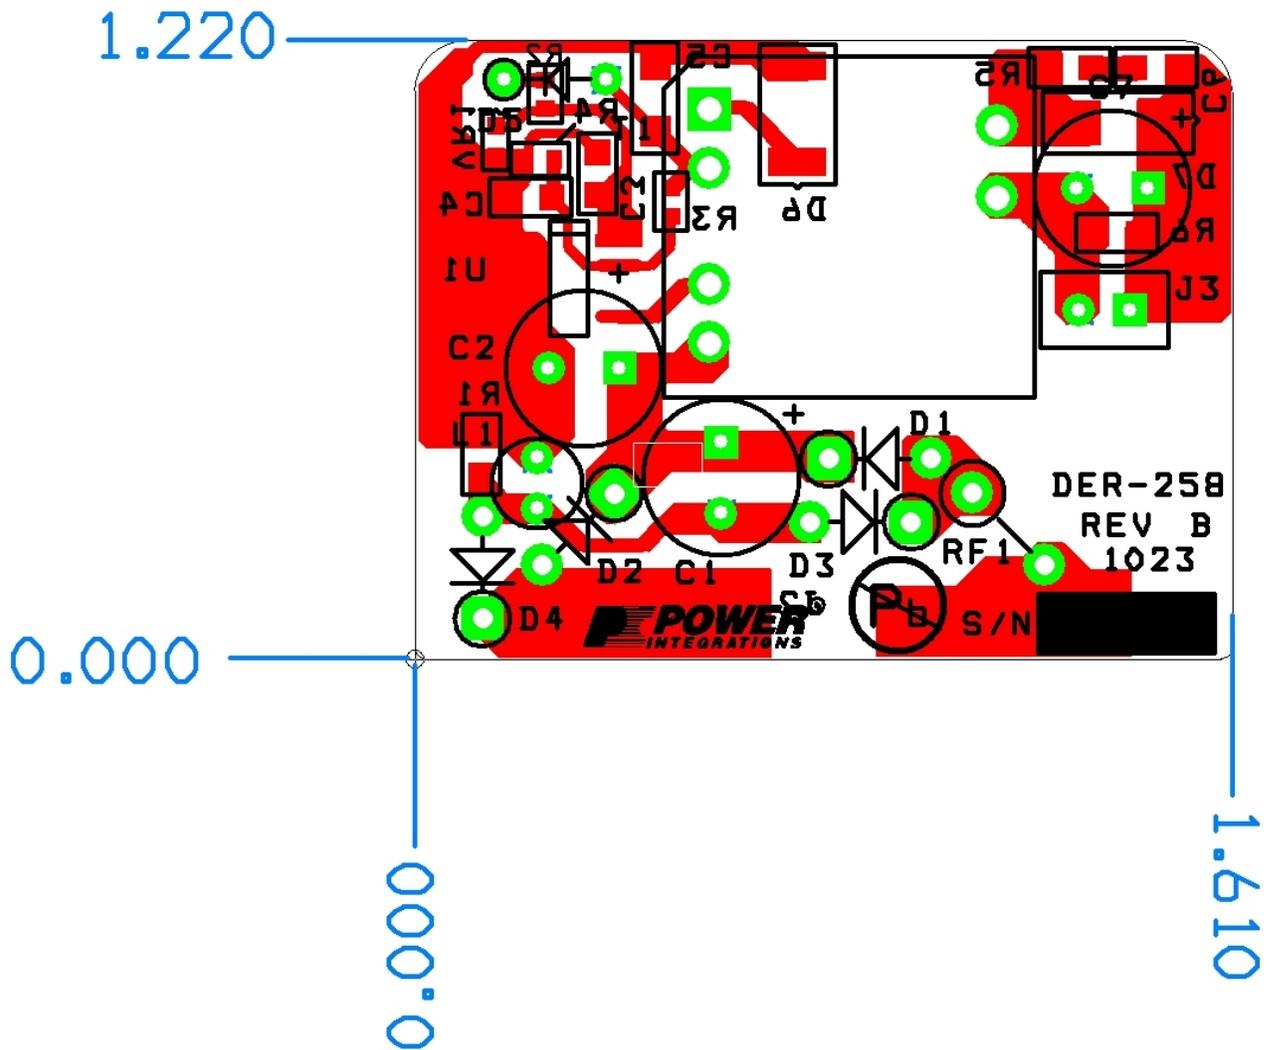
Printed Circuit Board Layout (Dimensions in Inches).
